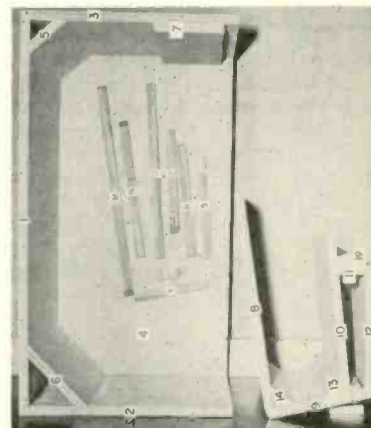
Method of simplifying the assembly by use of temporary locating strips.
